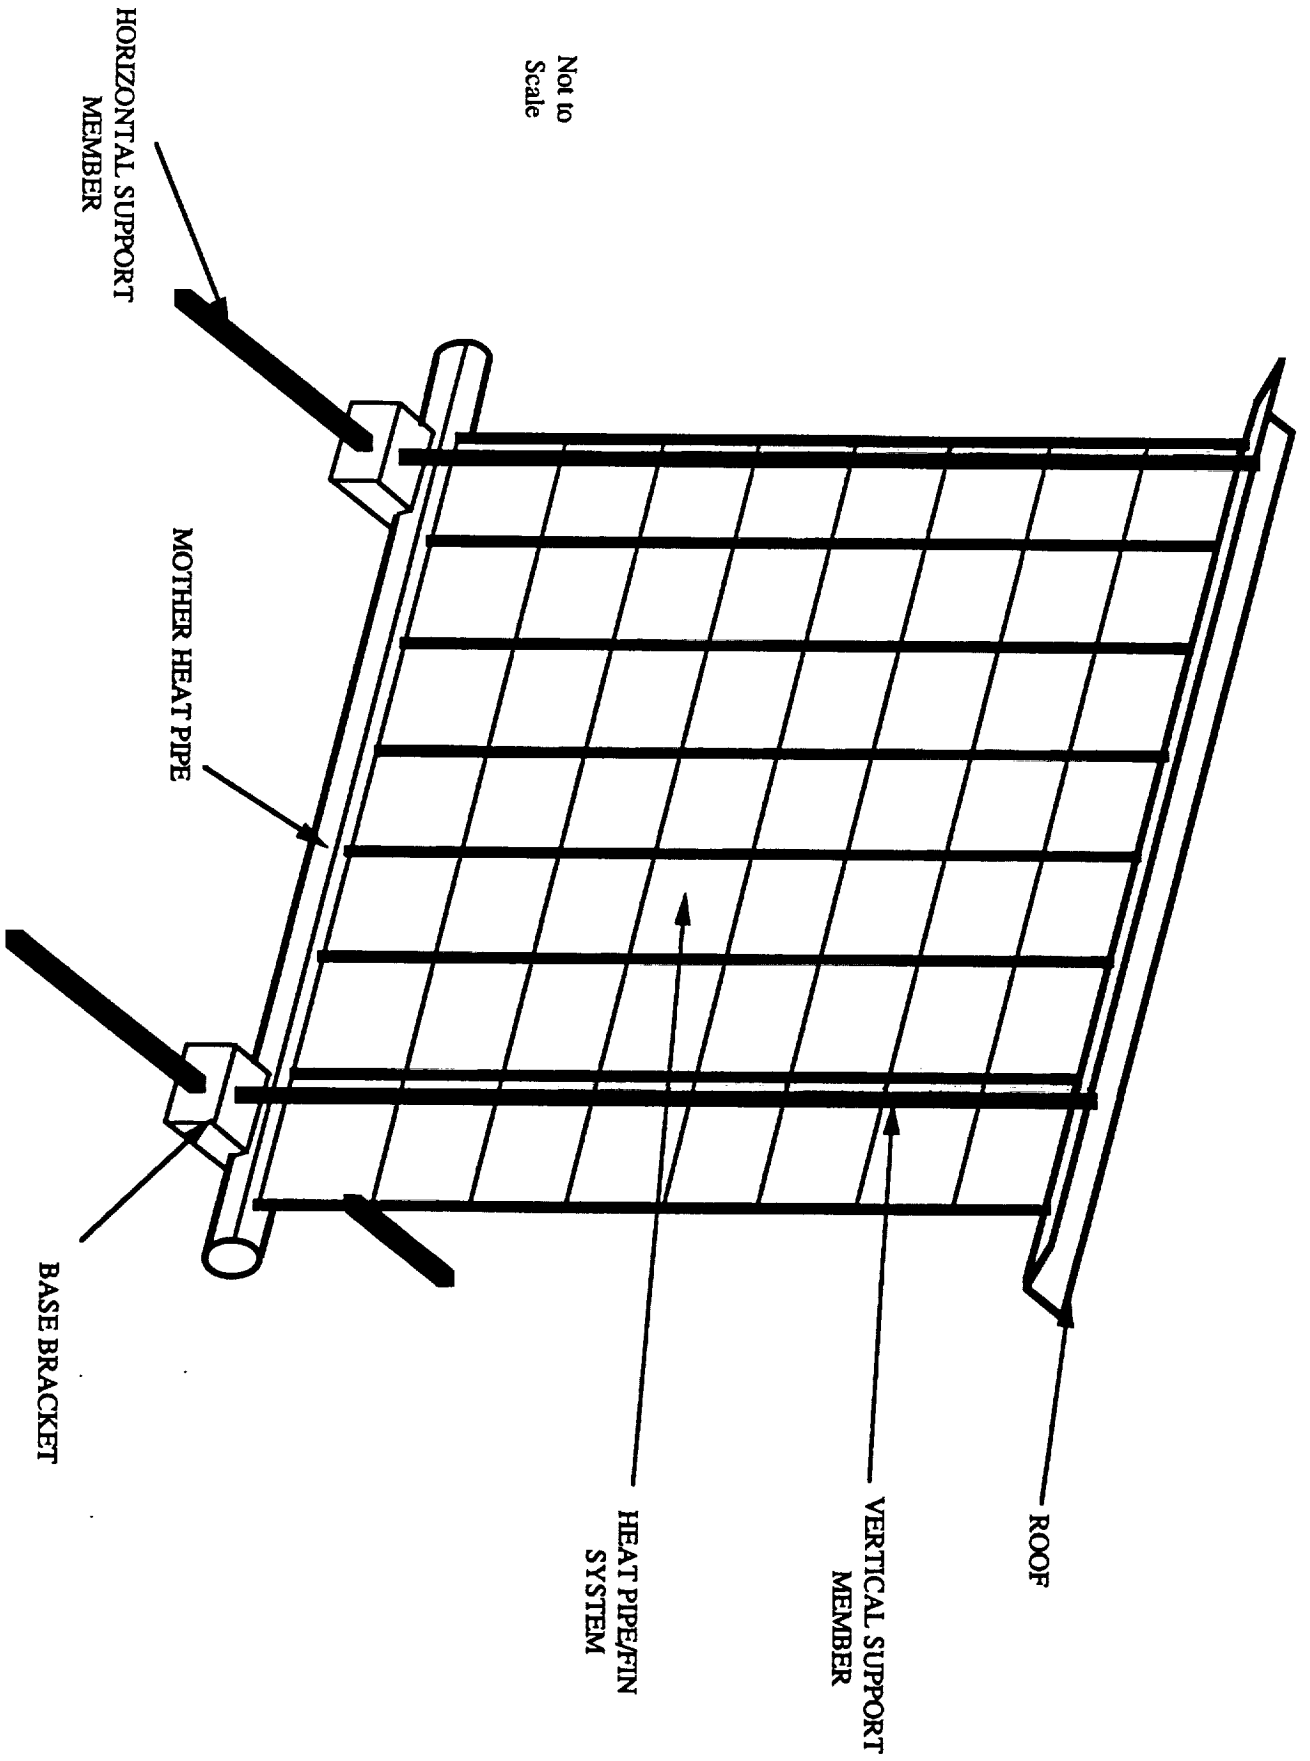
Isometric View of Heat Pipe Radiator.
